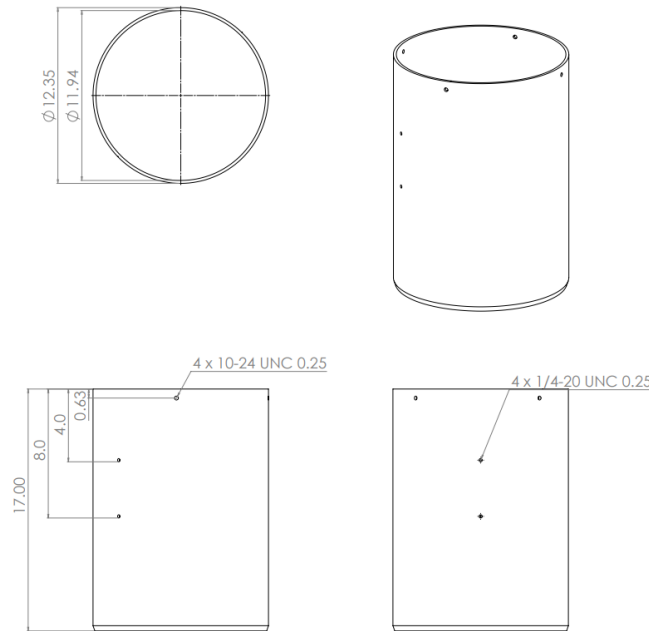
The clear PVC midsection drawing had relatively simple features, including fastener holes and a beveled edge.
